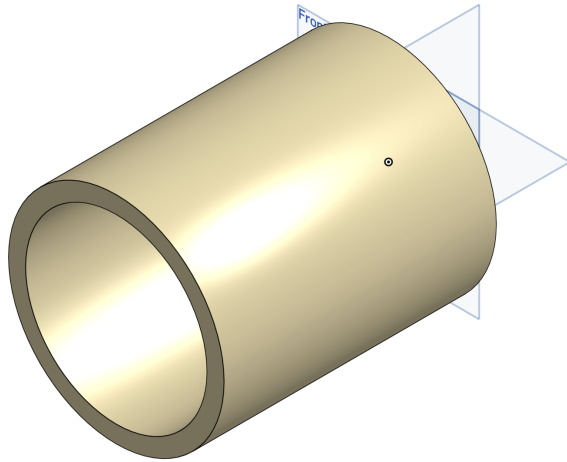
CAD detail view of the simplified nozzle geometry.
